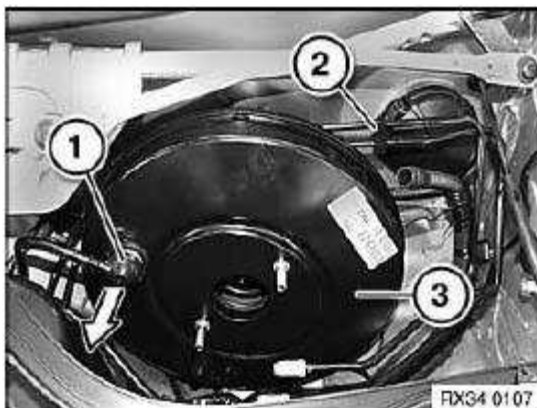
Identifying Non-Return Valve, Holder And Brake Booster
